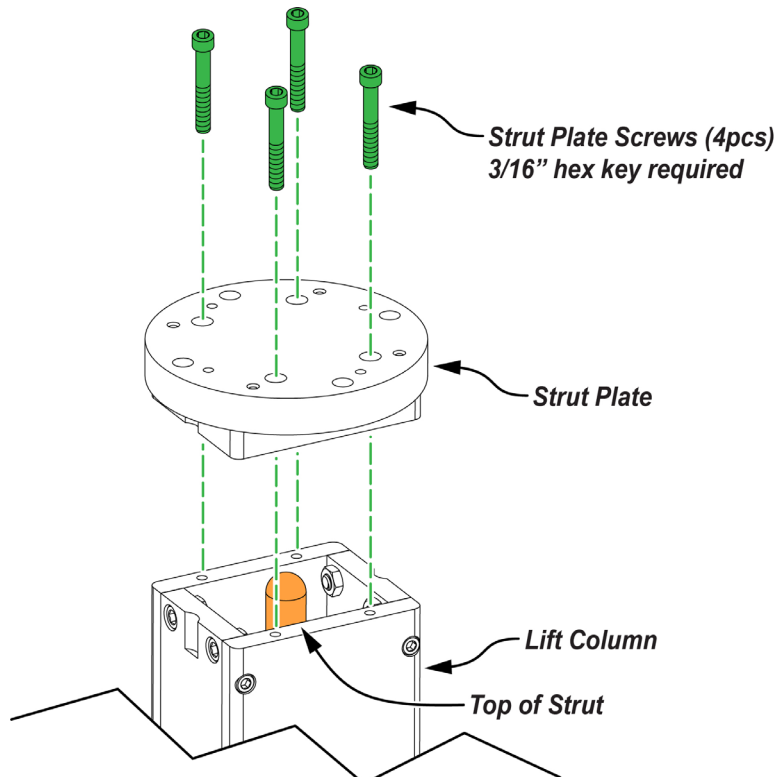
Removing the Strut Plate Screws (4 pcs)
